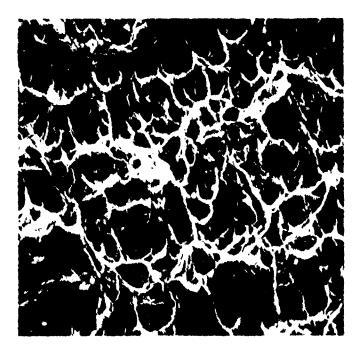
Elongated dimples on shear lip of fracture surface, 3500x.
